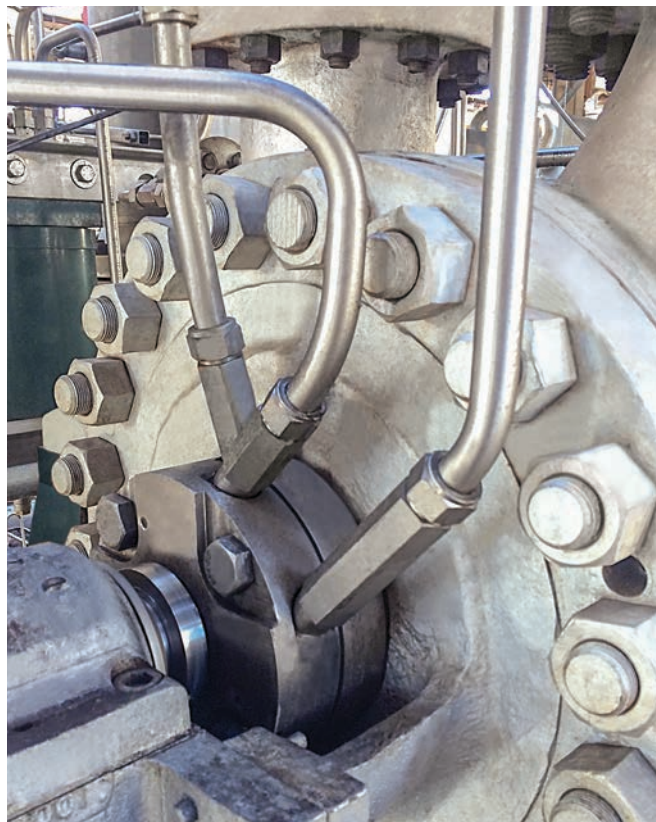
Stainless steel tubing on mechanical seal. Photo courtesy of Swagelok Company.
